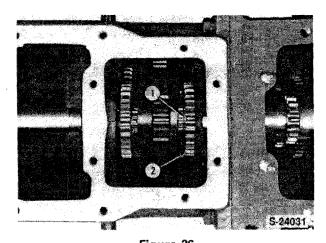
Main Shaft Drive Gear Removal 1. Snap Ring 2. Drive Gear
